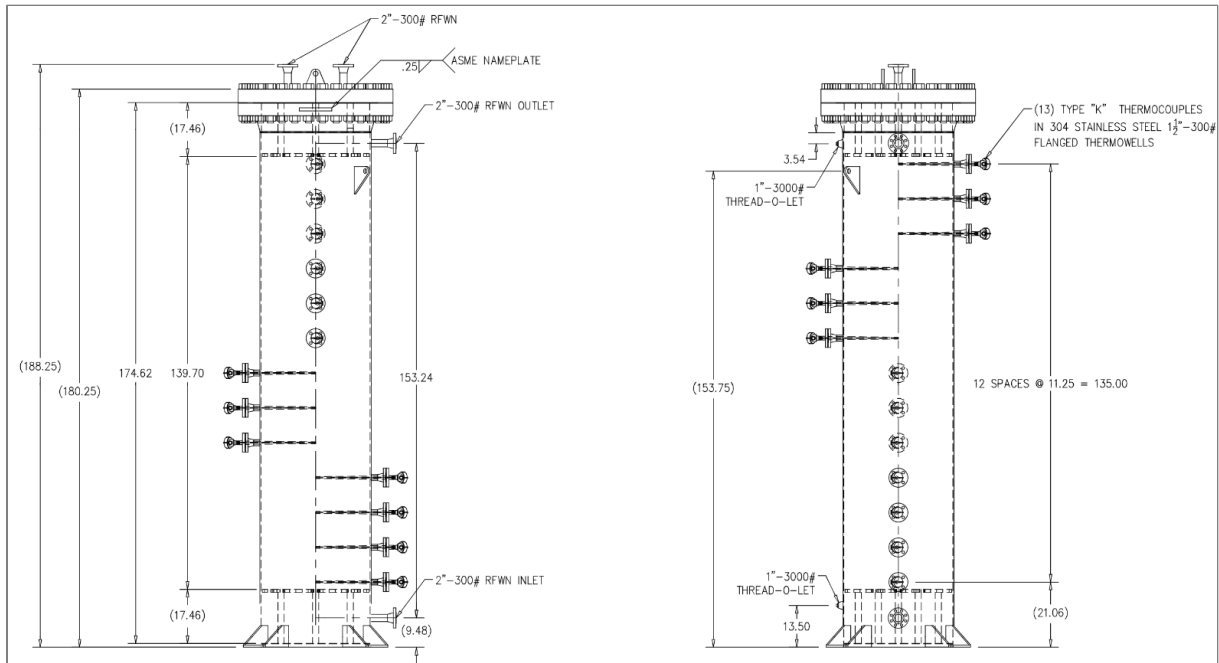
Drawing of the thermocline tank, with the positions of the (multi-point) thermocouples.
